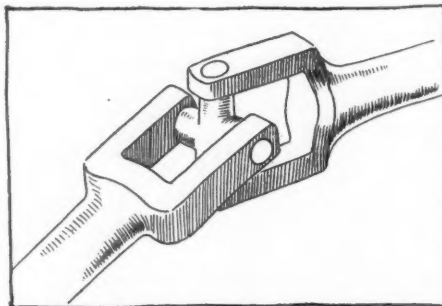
SIMPLE FORM OF UNIVERSAL JOINT
